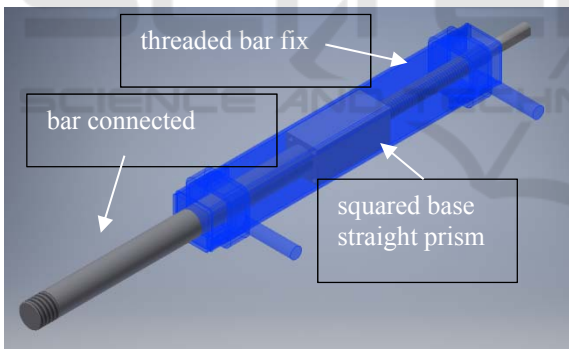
Linear actuator. Designed, developed and built in our laboratory.
